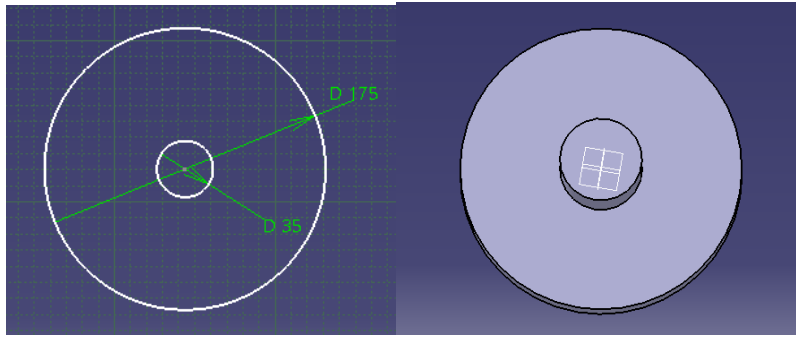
Modified propeller shaft's circular plates with their dimension
